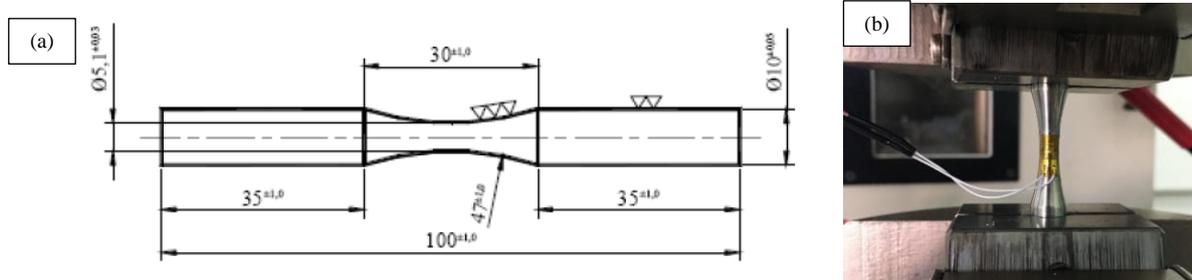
(a) Dwell-fatigue and fatigue test specimen geometry and (b) detail of dwell-fatigue specimen with extensometer.
